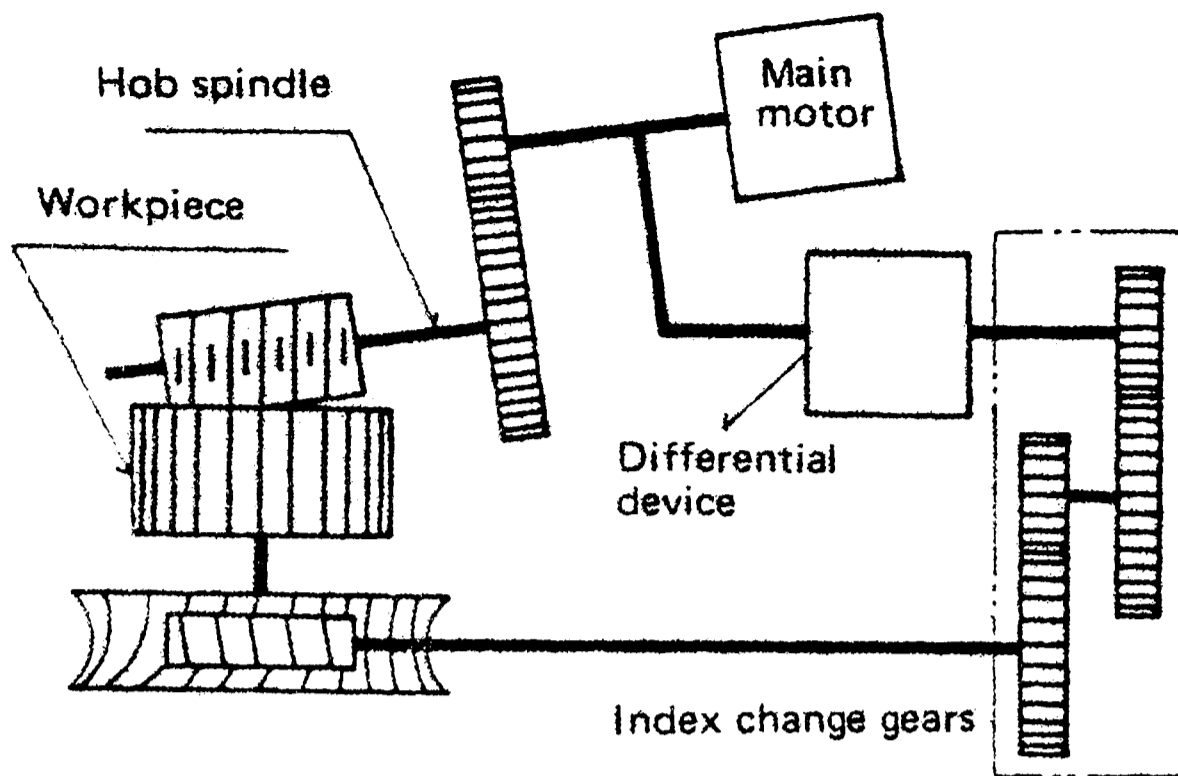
Gear train of a conventional hobbing machine index system [Nagafune].
